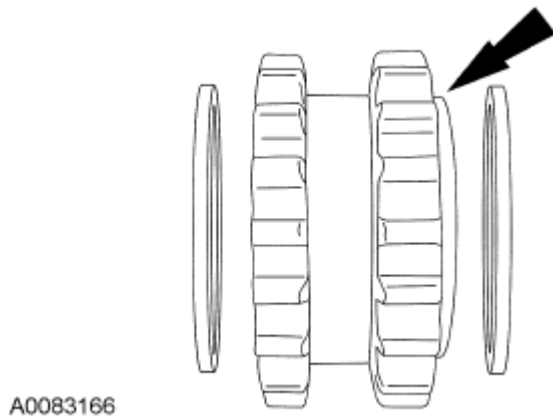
Locating Crankshaft Sprocket Diamond Washer
